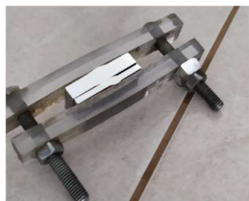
Testing samples for observation of macrostructure on both welded plates
